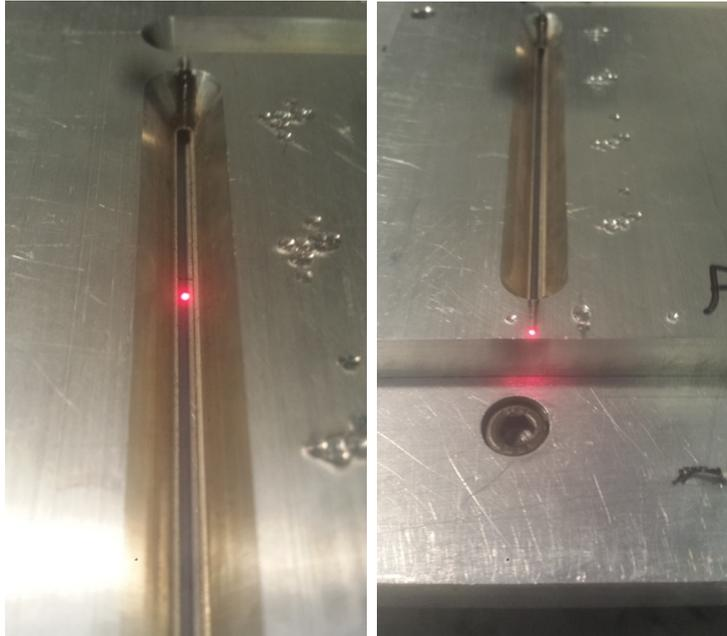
(Left) HeNe alignment laser aligned to the center of a vertical groove on a weld plate. (Right) HeNe alignment laser aligned to the proper overlap for a fixed weld line. Notice the beam is aligned onto the welding plate.
